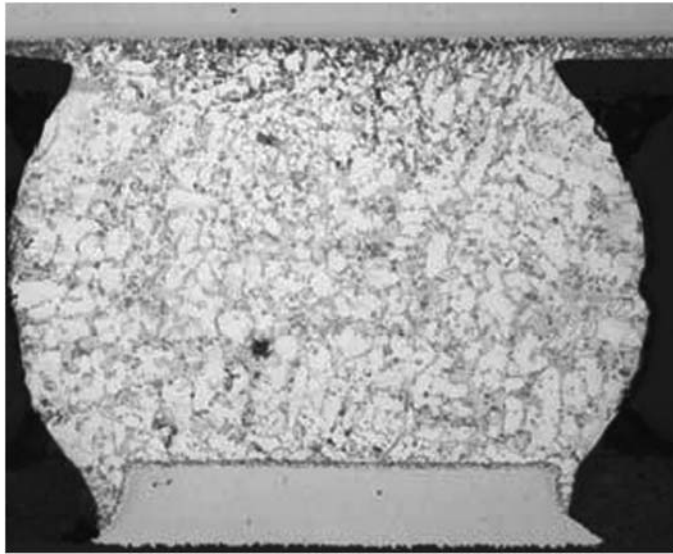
Microstructure of Sn-Ag-Cu solder for a BGA solder ball.
